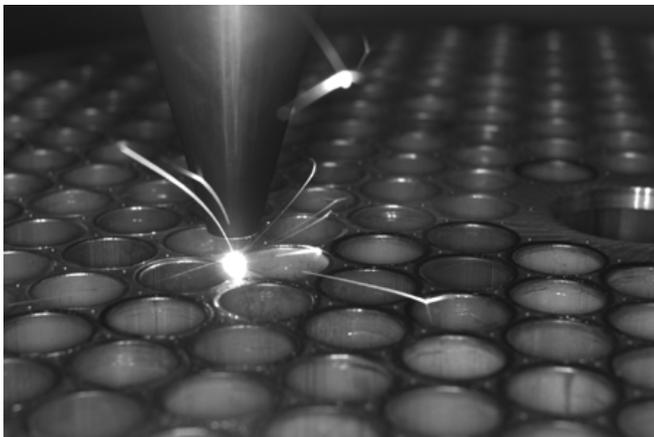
CO₂ laser welding of 1 in diameter tubes into pressure vessel tubesheet.
